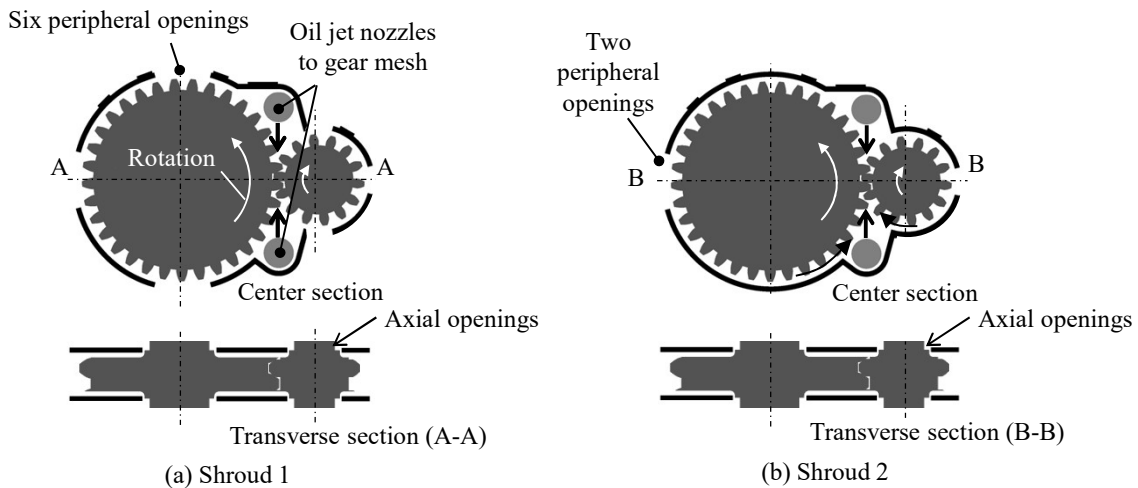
Shape of shrouds for the two-axis helical gearbox (GA)
